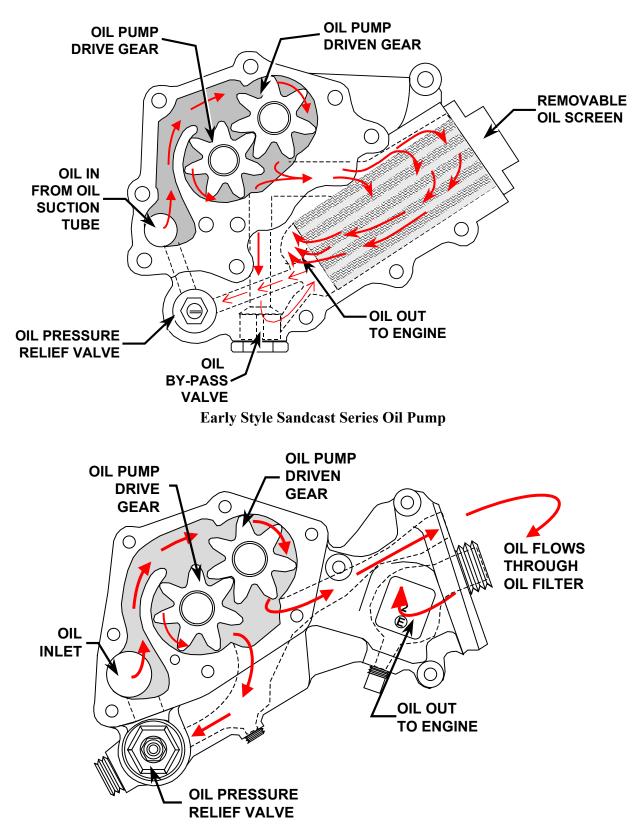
Early & New Style Sandcast Series Oil Pump Design
